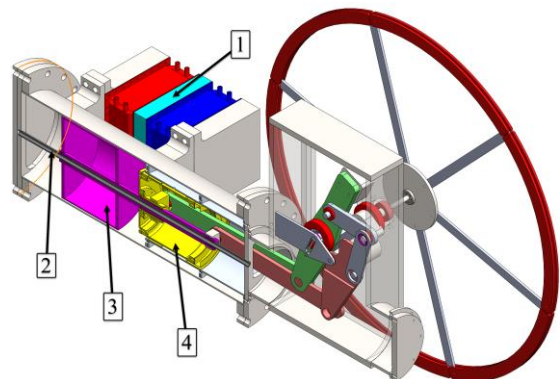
Preliminary engine model with the heat exchanger assembly (1), guide rod (2), displacer piston (3), and power piston (4) shown
